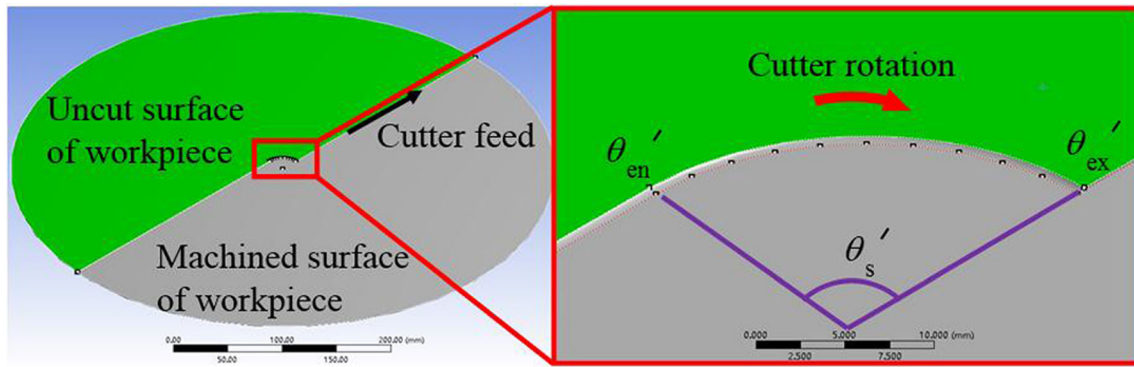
Schematic of cutting zone for the FEA model of mirror-milling the skin panel
